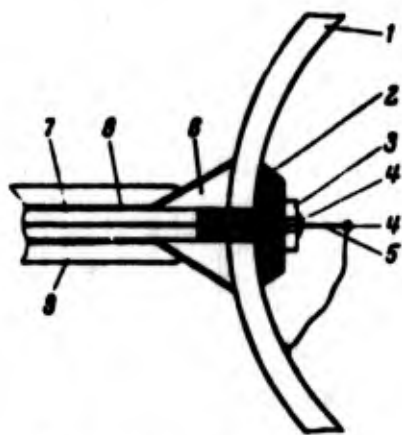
Diagram of fastening spherical sensing device of the sound receiver to the cable. 1) spherical ceramic element; 2) textolite bushing; 3) metallic washer; 4) tin soldering; 5) central strand of the coaxial cable; 6) rubber conical bushing; 7) dielectric of the coaxial cable; 8) screen of the cable; 9) external rubber or plastic covering of the cable.
